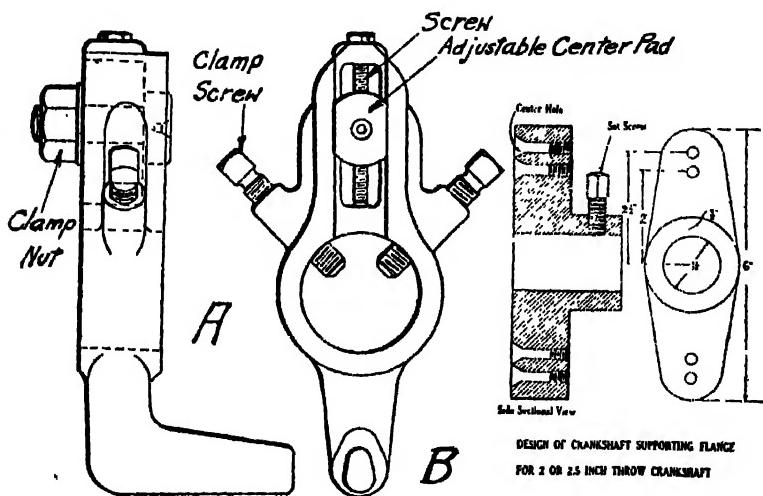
Adjustable Center Lathe Dog and Crankshaft Supporting Flange for Use in Turning Crank Pins on Lathes.
